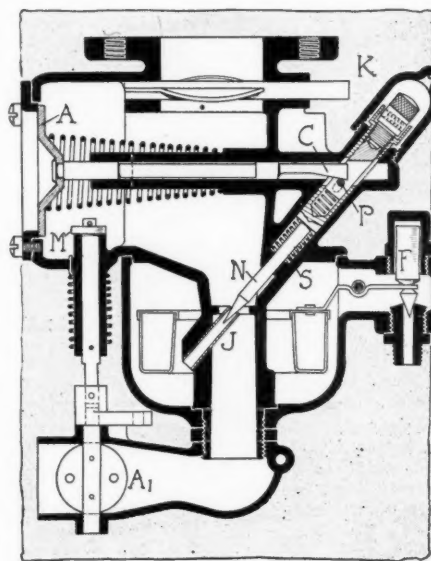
Showing the cam and pin connection between the air valve A and the gasoline needle N of the Muir carbureter.
